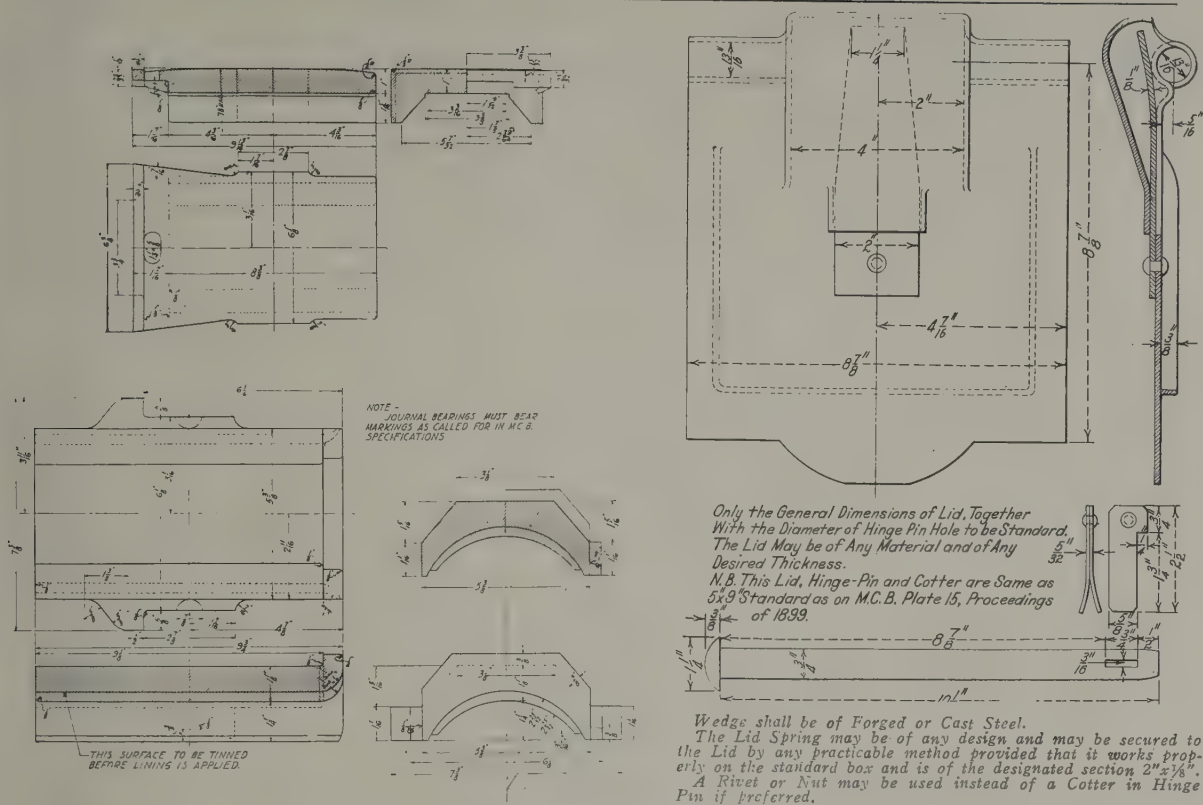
M. C. B. Standard Bearing, Wedge and Journal Box Lid for 5½ in. by 10 in. Journal.
